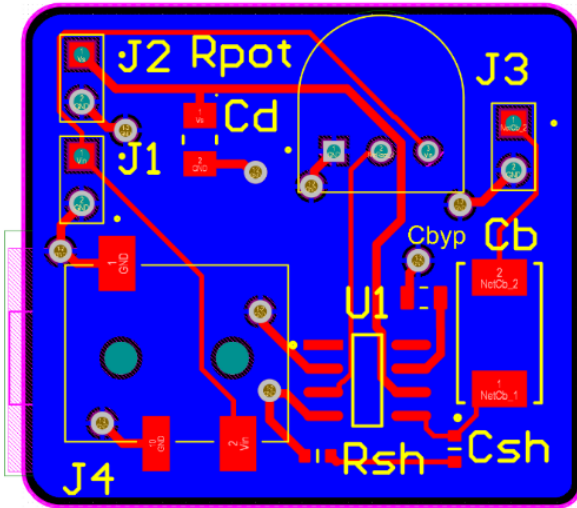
Printed circuit board (PCB) layout of audio amplifier using Altium Designer.
